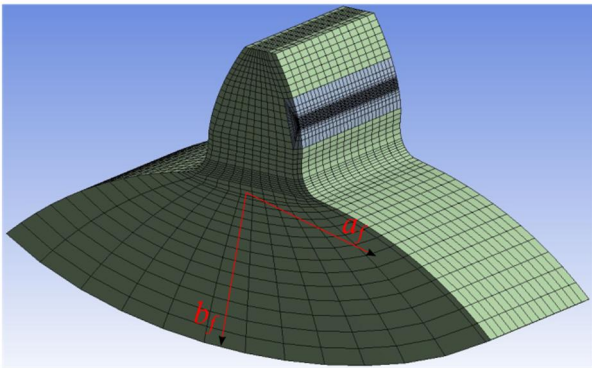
The FE Mesh of the gear tooth which consists of two parts.
